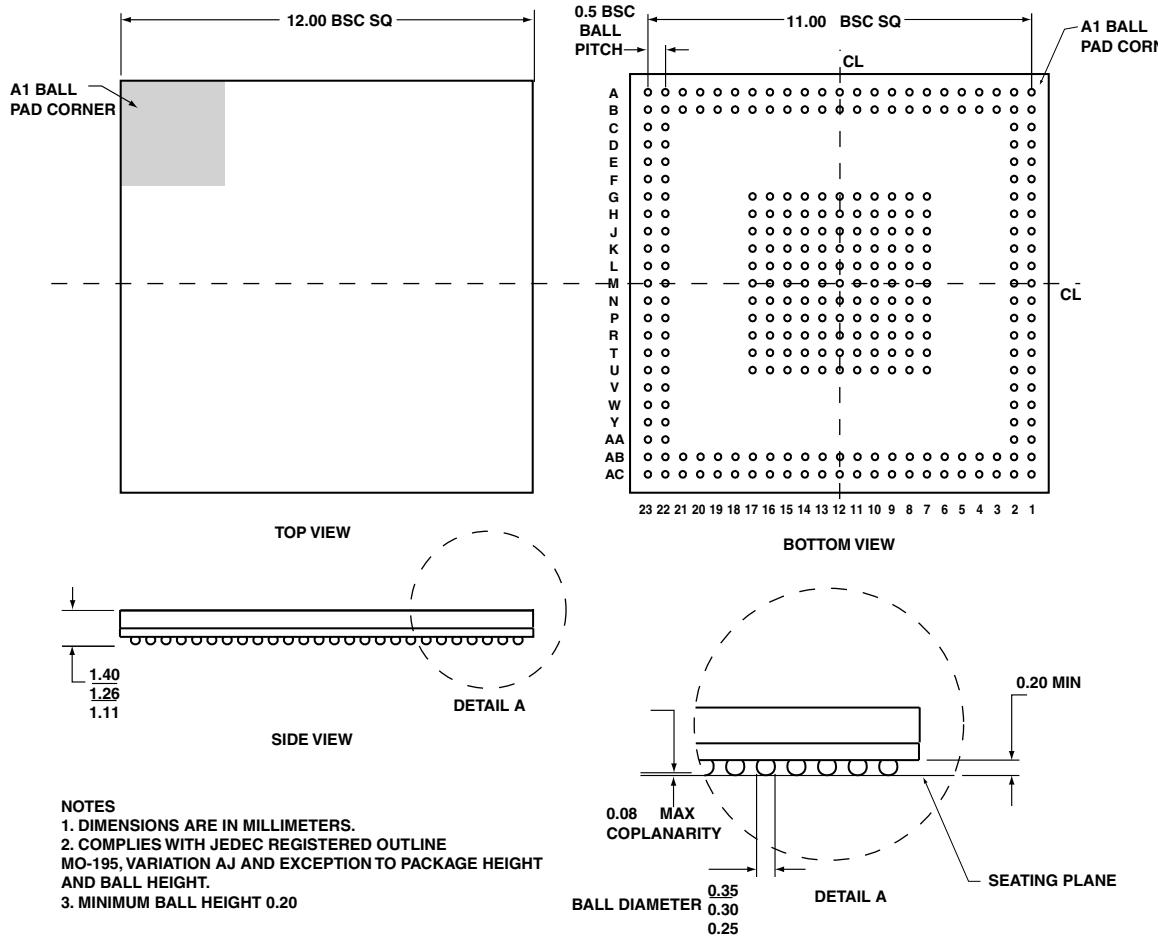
289-Ball CSP\_BGA (BC-289-2)
